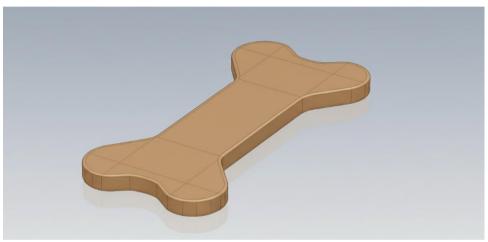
CAD designs of Dog-Bone Tensile Specimen.
